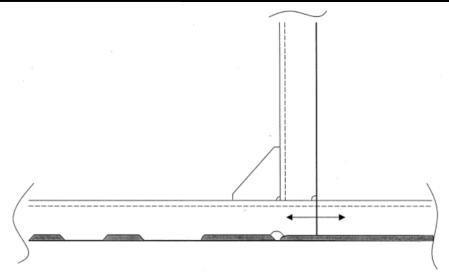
Weld termination towards tank boundary
